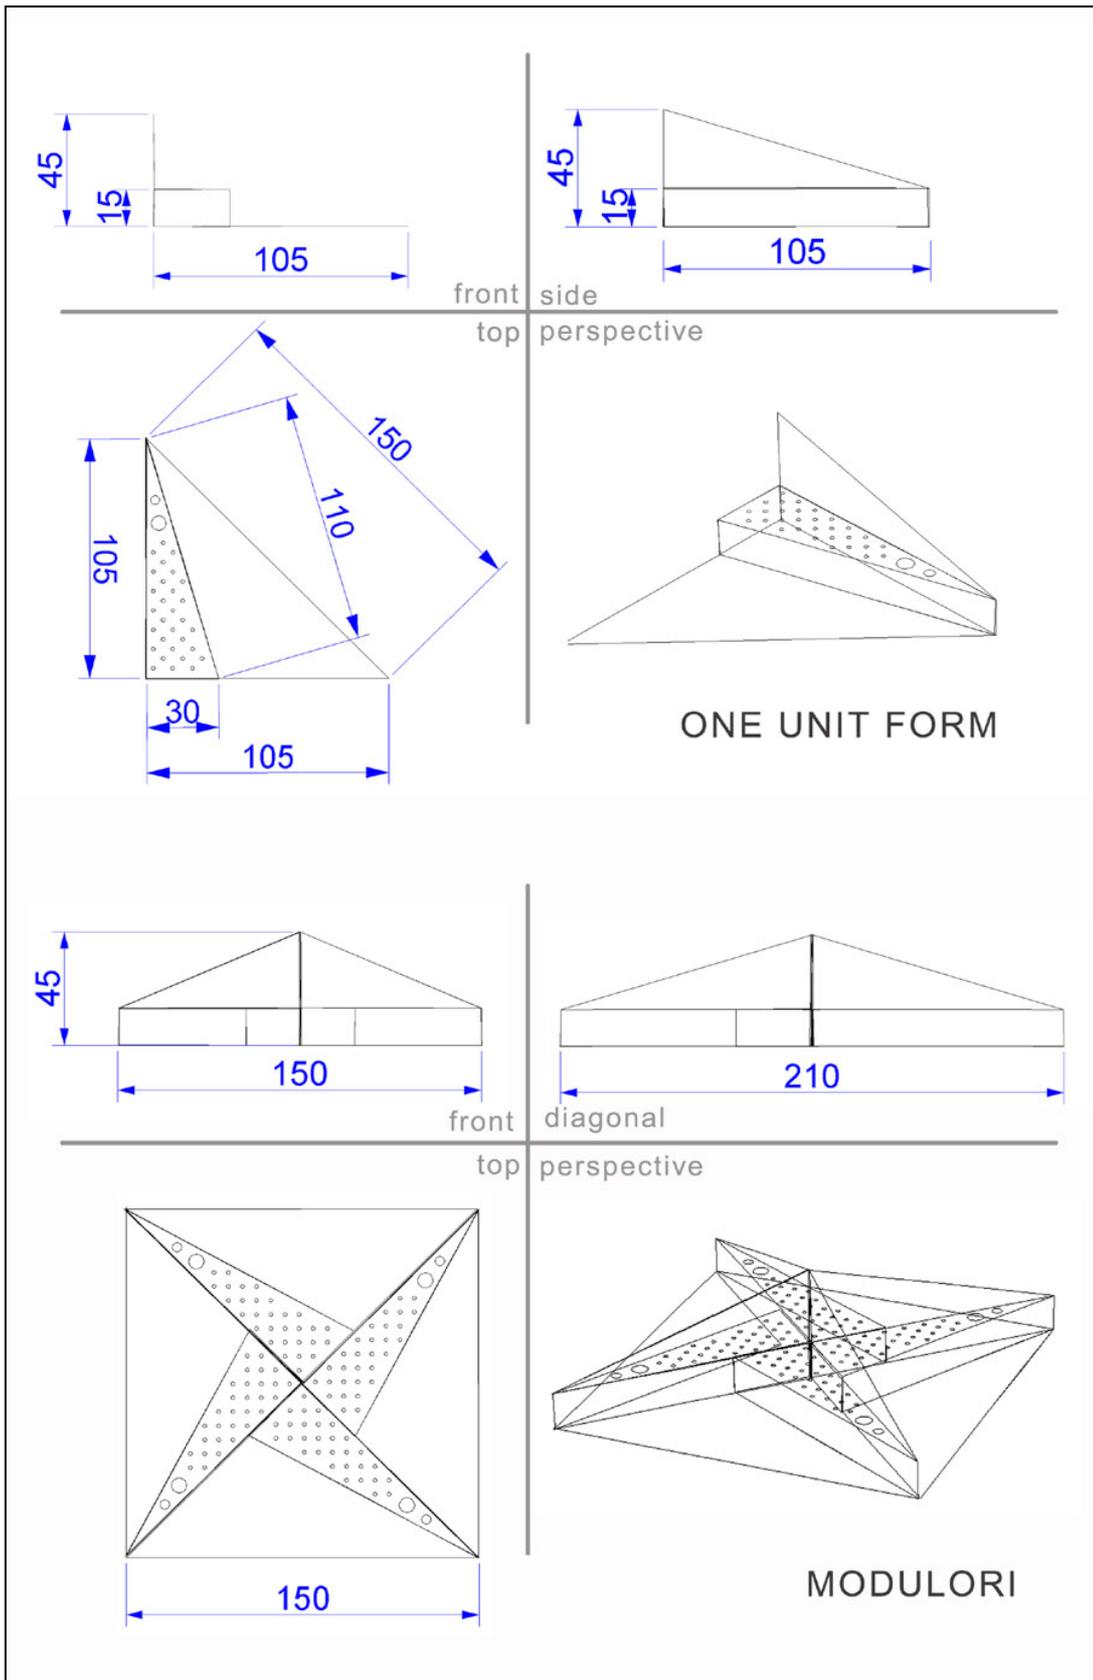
Technical Drawings Of ModulOri (measures: mm, scale: 1/20)
